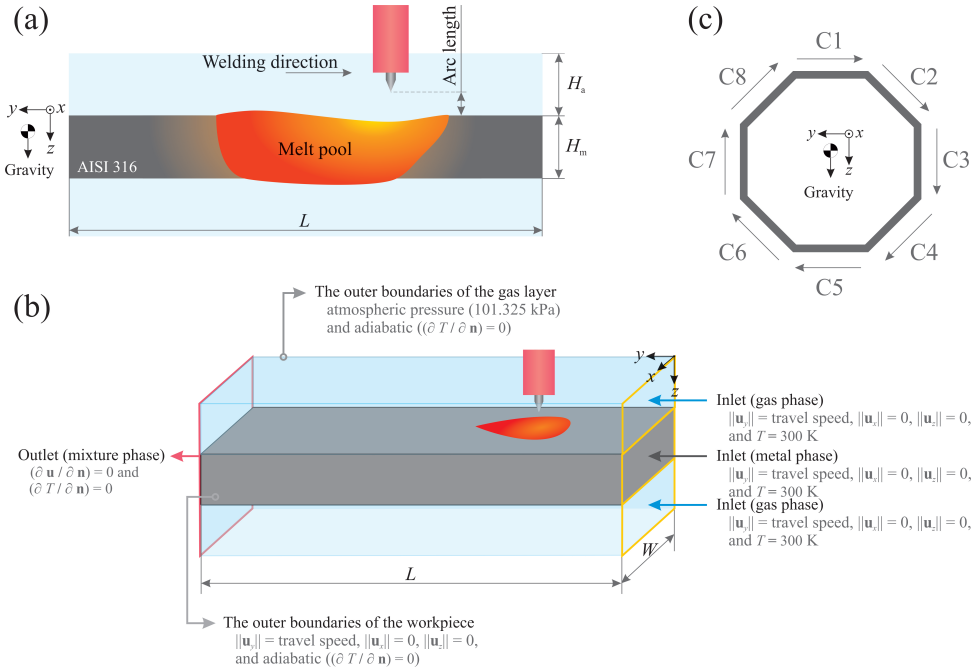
Schematic of moving gas tungsten arc welding (GTAW). (a) a cross section of the plate showing a fully-penetrated melt pool, (b) three-dimensional view of the problem under consideration and (c) different welding positions studied in the present chapter.
